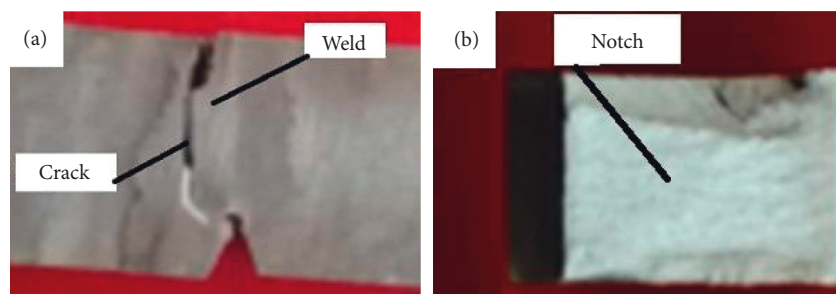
Macrograph of fractured sample after the impact toughness test: (a) front view; (b) cross-sectional view.
